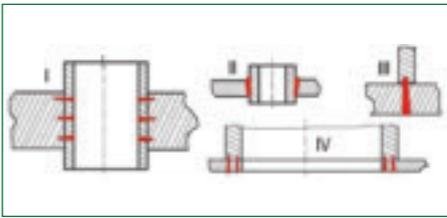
Plate-pipe joints suitable for laser beam welding (one-sided accessibility).
